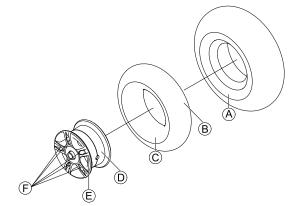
Example of Storm⁴ MAX castor wheel. Valve and valve cap ® are not shown in illustration.
